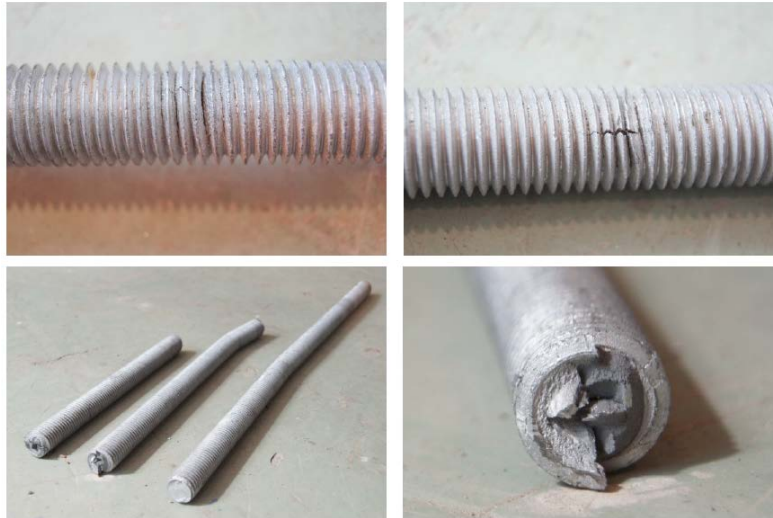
Parallel cracks (top left), perpendicular cracks (top right) and rupture (bottom left and bottom right) of long threaded rods (Baird 2014)
